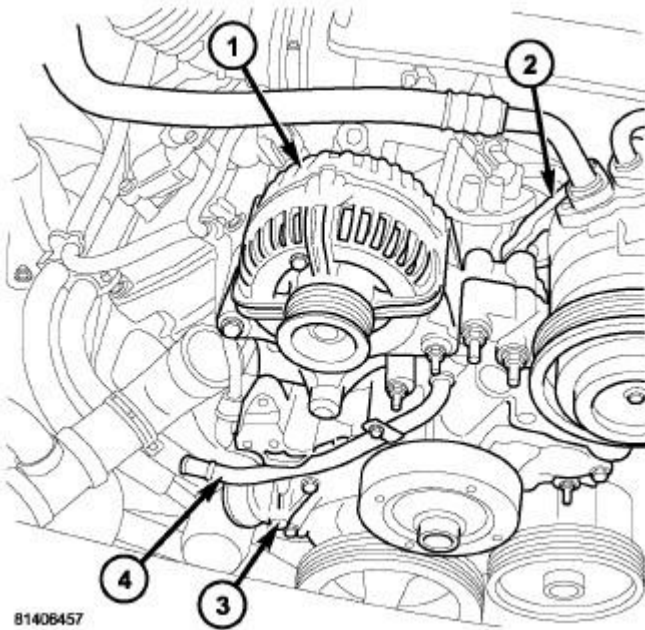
Generator, A/C Compressor & Water Pump - 5.7L
